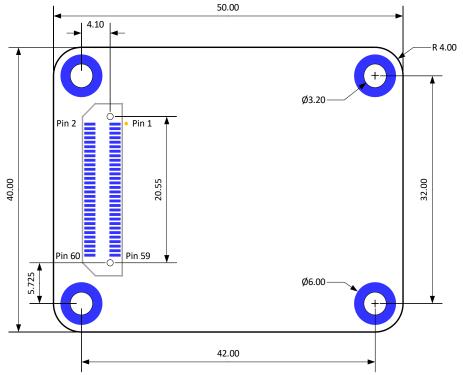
MIPI DSI display adapter dimensions (top view through the PCB)
